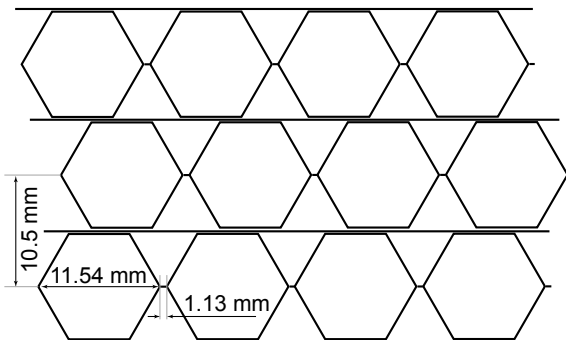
Components and construction of the bottom half of single honeycomb monolayer. After the wires have been put in the open bottom-half, another mould holding the top foil is placed on top and glued and point-welded together to close the honeycomb cells.
